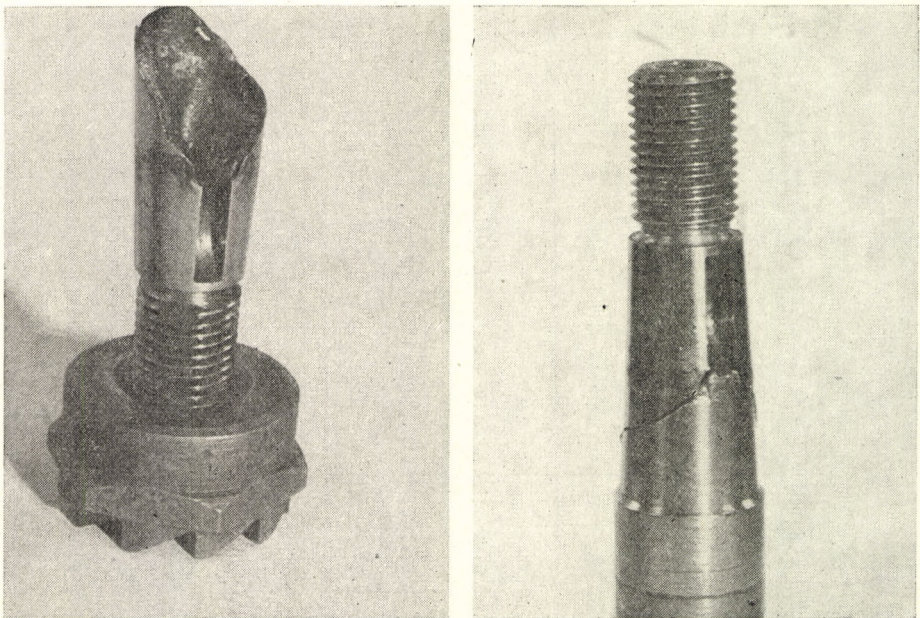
Typical form of fatigue fracture caused by torsional stress
